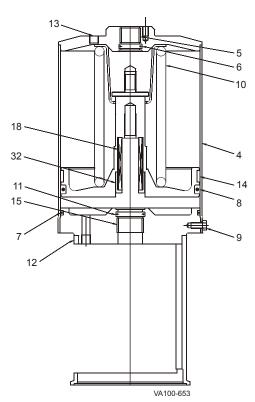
W71/W72RS Sch. 5 Actuator Assembly (Non-Seat Lift Valve)
